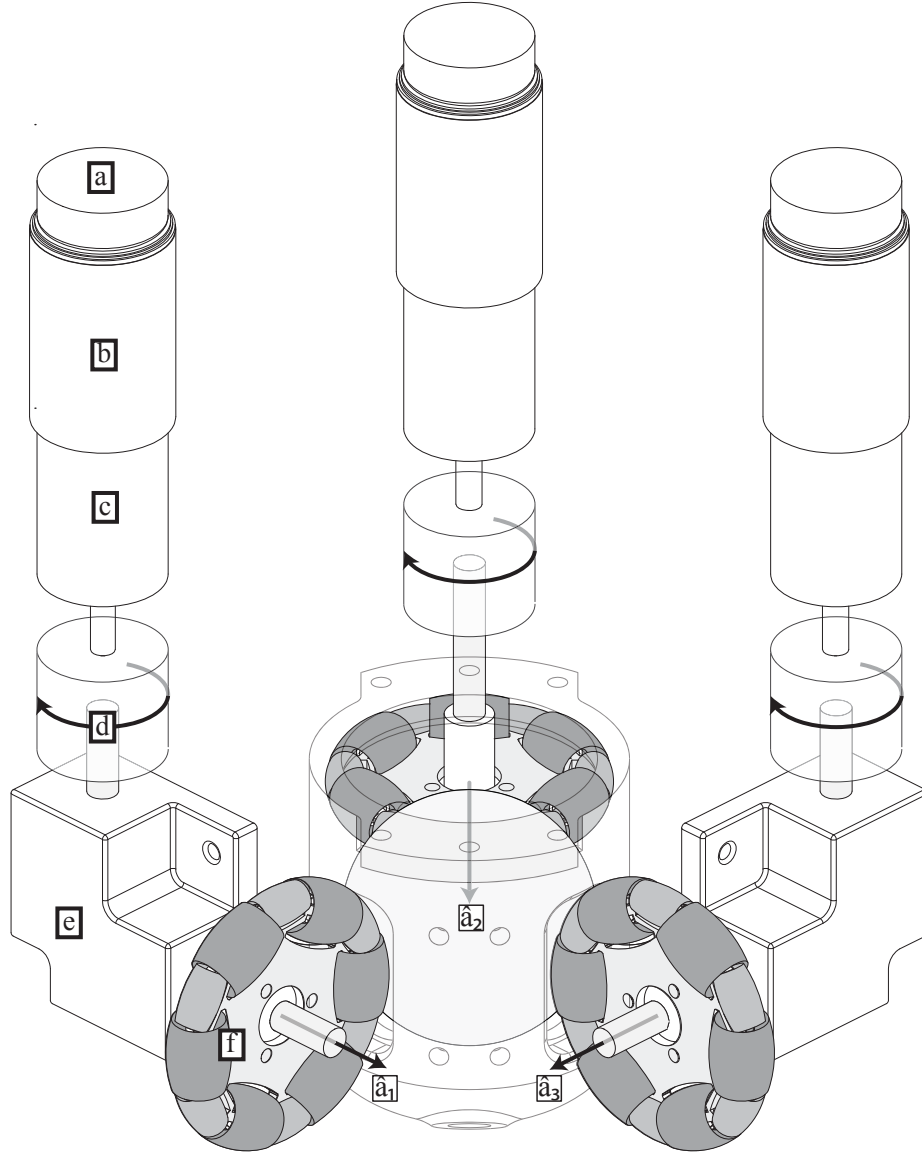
A parallel arrangement of gearmotors, each consisting of an encoder (a), a DC-motor (b), and a gearhead (c), which transmit torque to the mutually orthogonal omniwheel axes \hat{a}_i through helical couplings (d). Two of the axes utilize 90° gearboxes (e). Omniwheels (f) contact the spherical magnet through openings in the housing.
